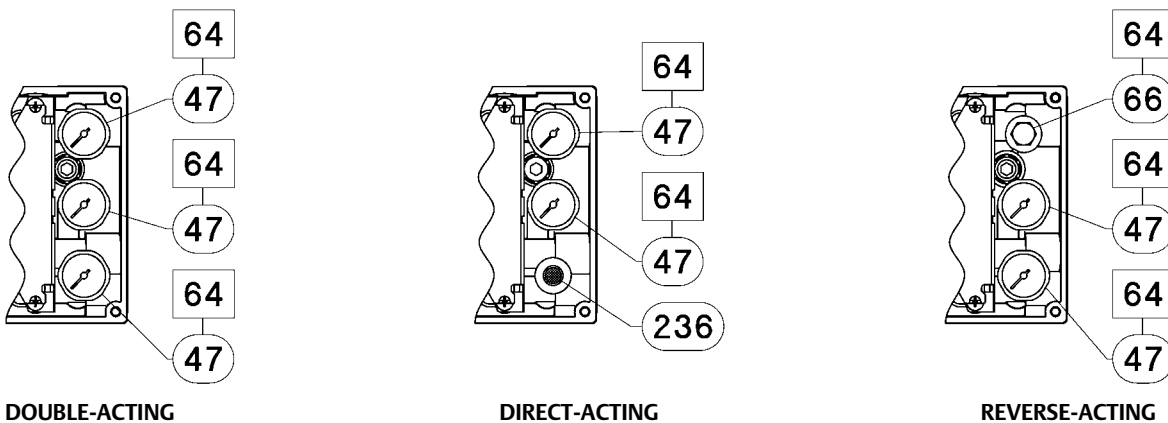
FIELDVUE DVC6200 SIS Digital Valve Controller Housing Assembly (continued)
